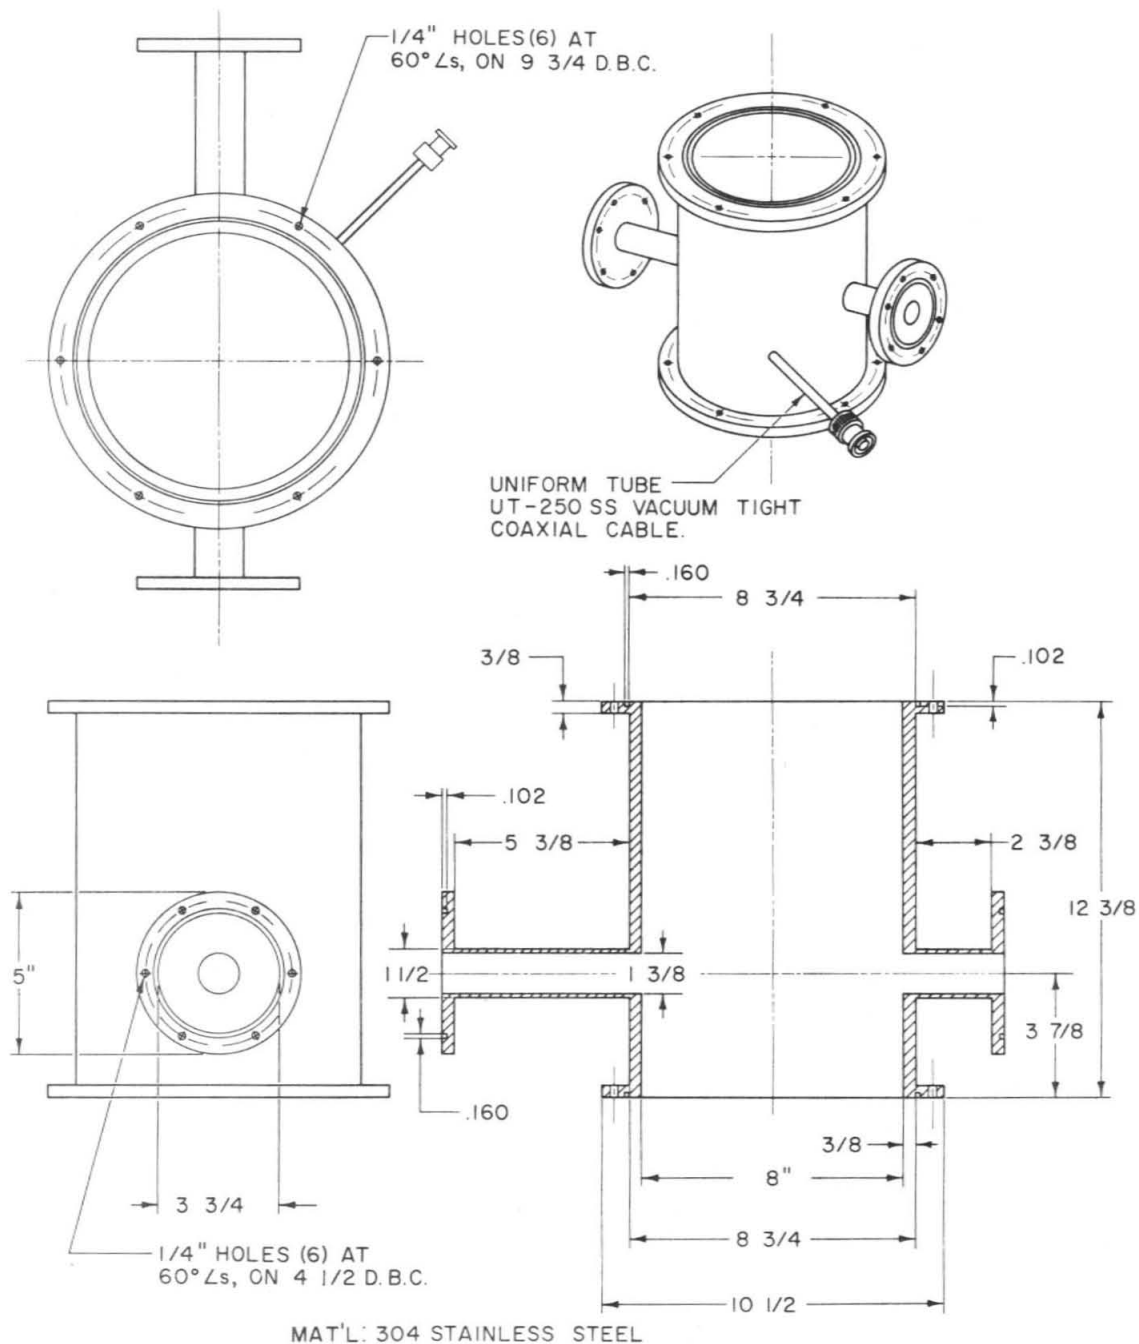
Drawing showing main vacuum tank. Dimensions are in inches.
